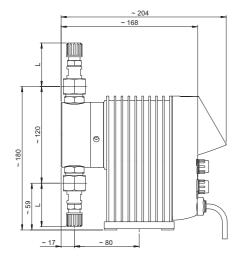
Dimensioned drawing of MAGDOS LK with dosing head made of PVC, PP or PVDF (all dimensions in mm)
